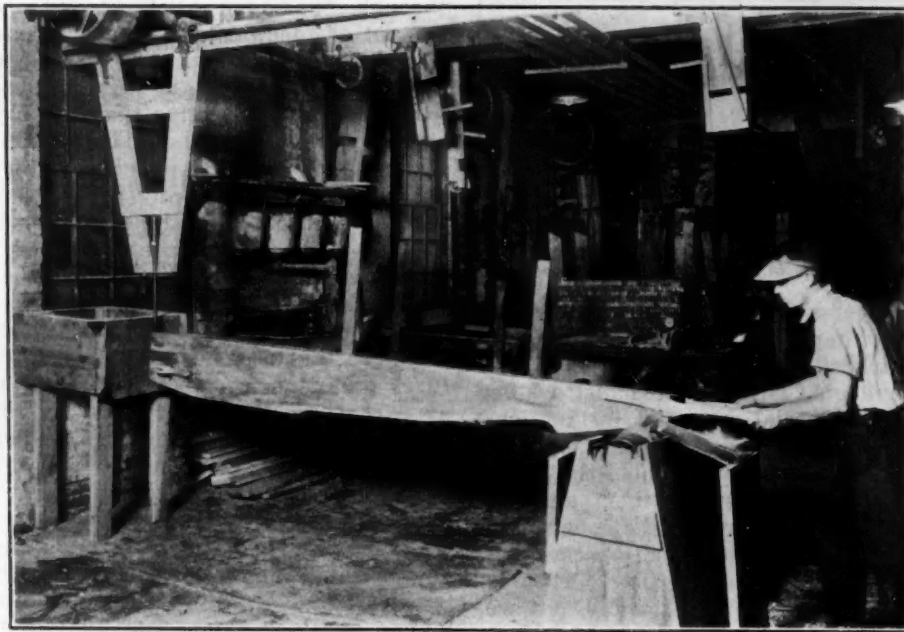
METHOD OF MAKING THE OPERATION OF A BULL SHAPING-MACHINE SAFE
